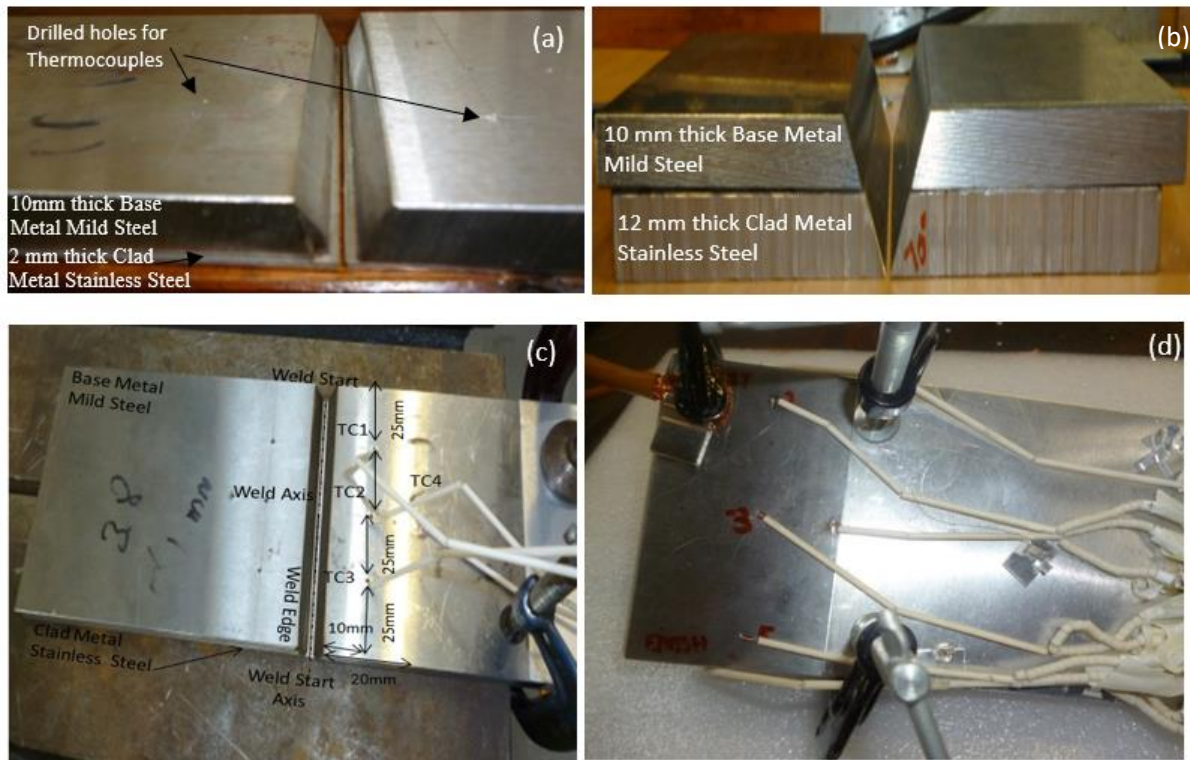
(a) Weld set up showing drilled holes for thermocouples. (b) Weld set up on mild steel (10 mm) and 12 mm stainless steel (c) Positions 1 to 4 of 10 mm mild steel and 2 mm stainless steel clad with thermocouples (d) Marked positions 2 to 5 of weld block
